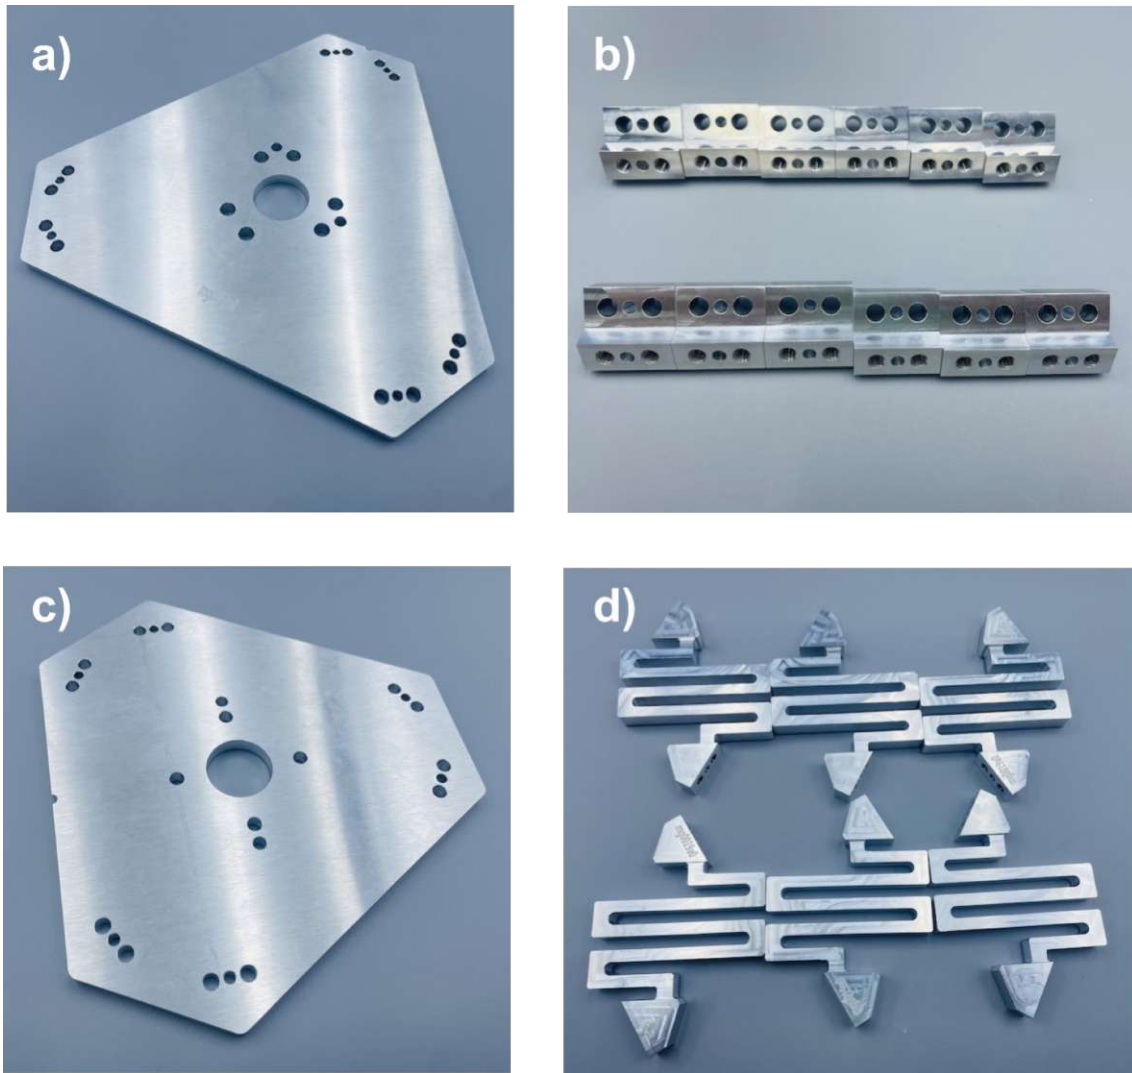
Machined parts for the Stewart-based Folded beam Vibration Isolator, a) Base isolator platform which will be mounted towards the robotic arm, b) Angular Mounting that will hold the folded beams in between the top and bottom platforms, c) Top isolator platform which will be mounted towards the Sanding tool, d) Folded beam Flexures.
